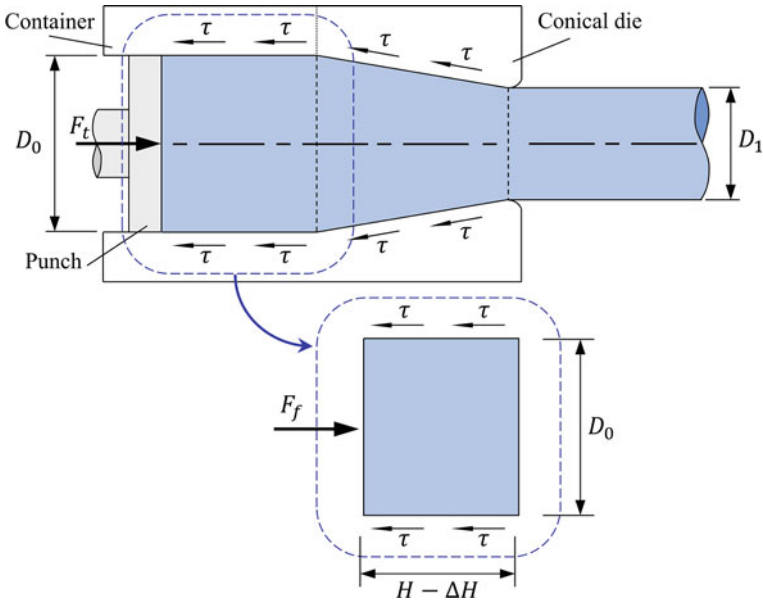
Schematic representation of a direct extrusion of a rod with special emphasis placed on the friction based shear stresses acting on the contacts between the workpiece and the tool set (container and conical die)
